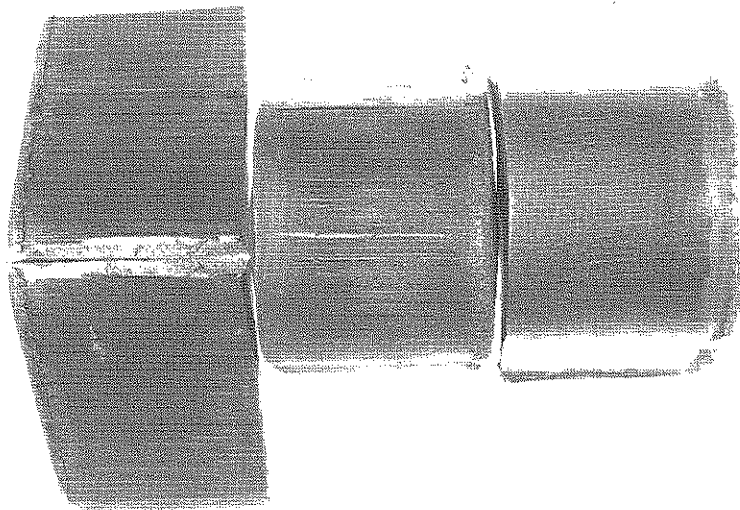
Bend specimens from 2 inch thick A588 steel cut at 8 inches per minute. Specimen on left cut with no auxiliary heat shows through crack (2.0 rating). Specimen in middle cut with auxiliary post heat shows major crack (1.0 rating). Specimen on right cut with auxiliary pre- and post-heat shows numerous slight cracks (0.7 rating).
